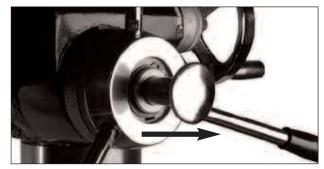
Mill/Drill Press Clutch pulled out, engaging the Drill Press
